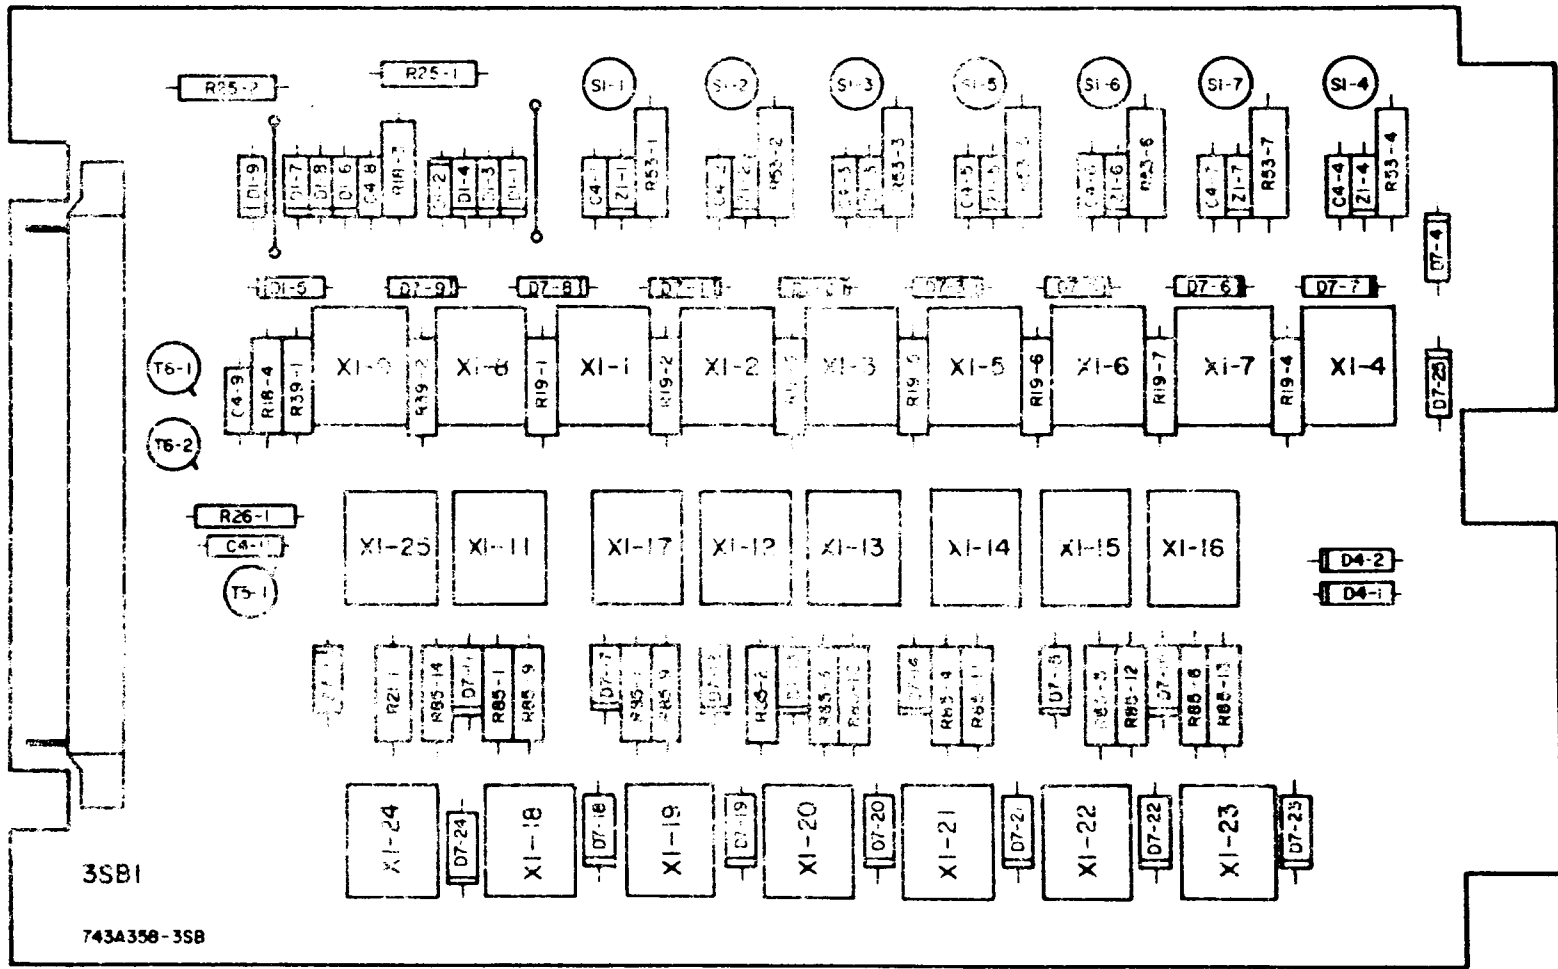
3SB1 ASSEMBLY (REF. DWG. 743A358, SUB 7)
